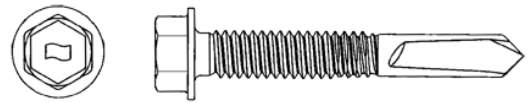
#12-24 INDENTED HEX WASHER HEAD TYPE 8 SCREW
